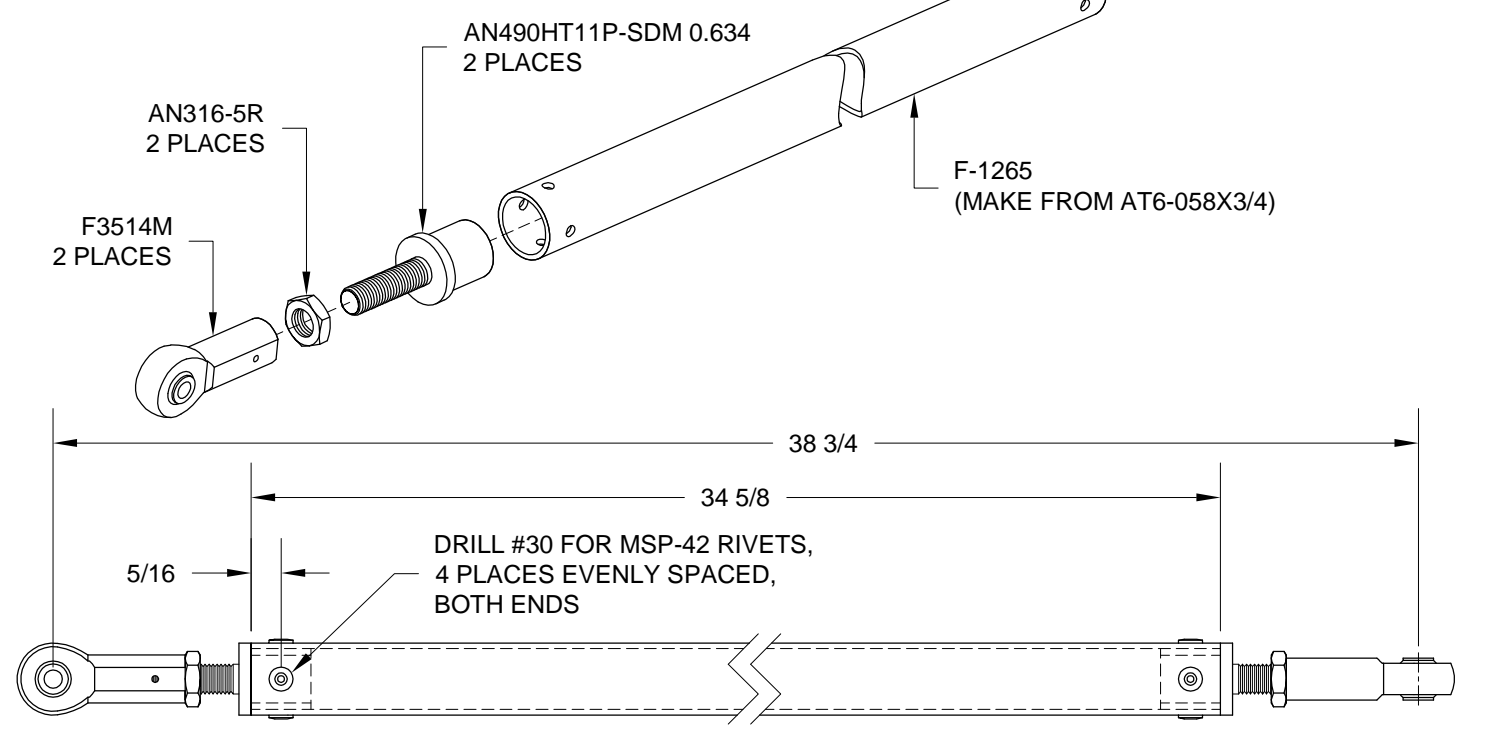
FLAPERON PUSHROD ASSEMBLY
